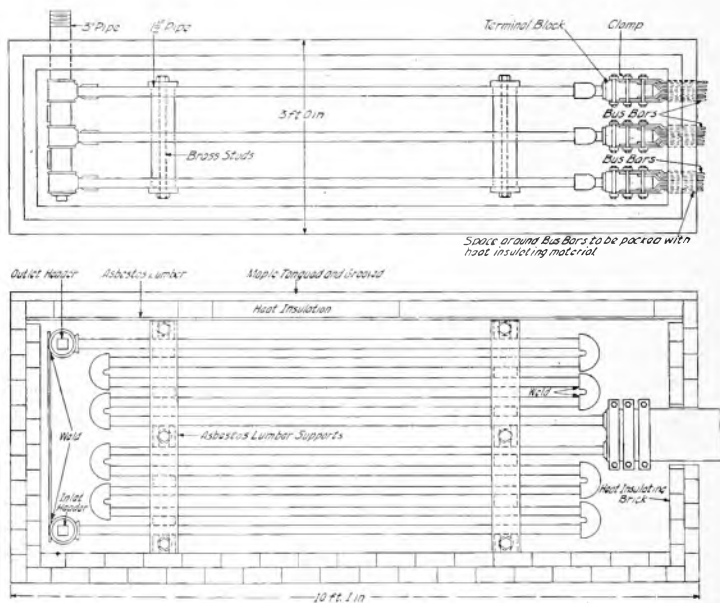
Plan and Elevation of a 1000-kw. Pipe-type Electric Water Heater
